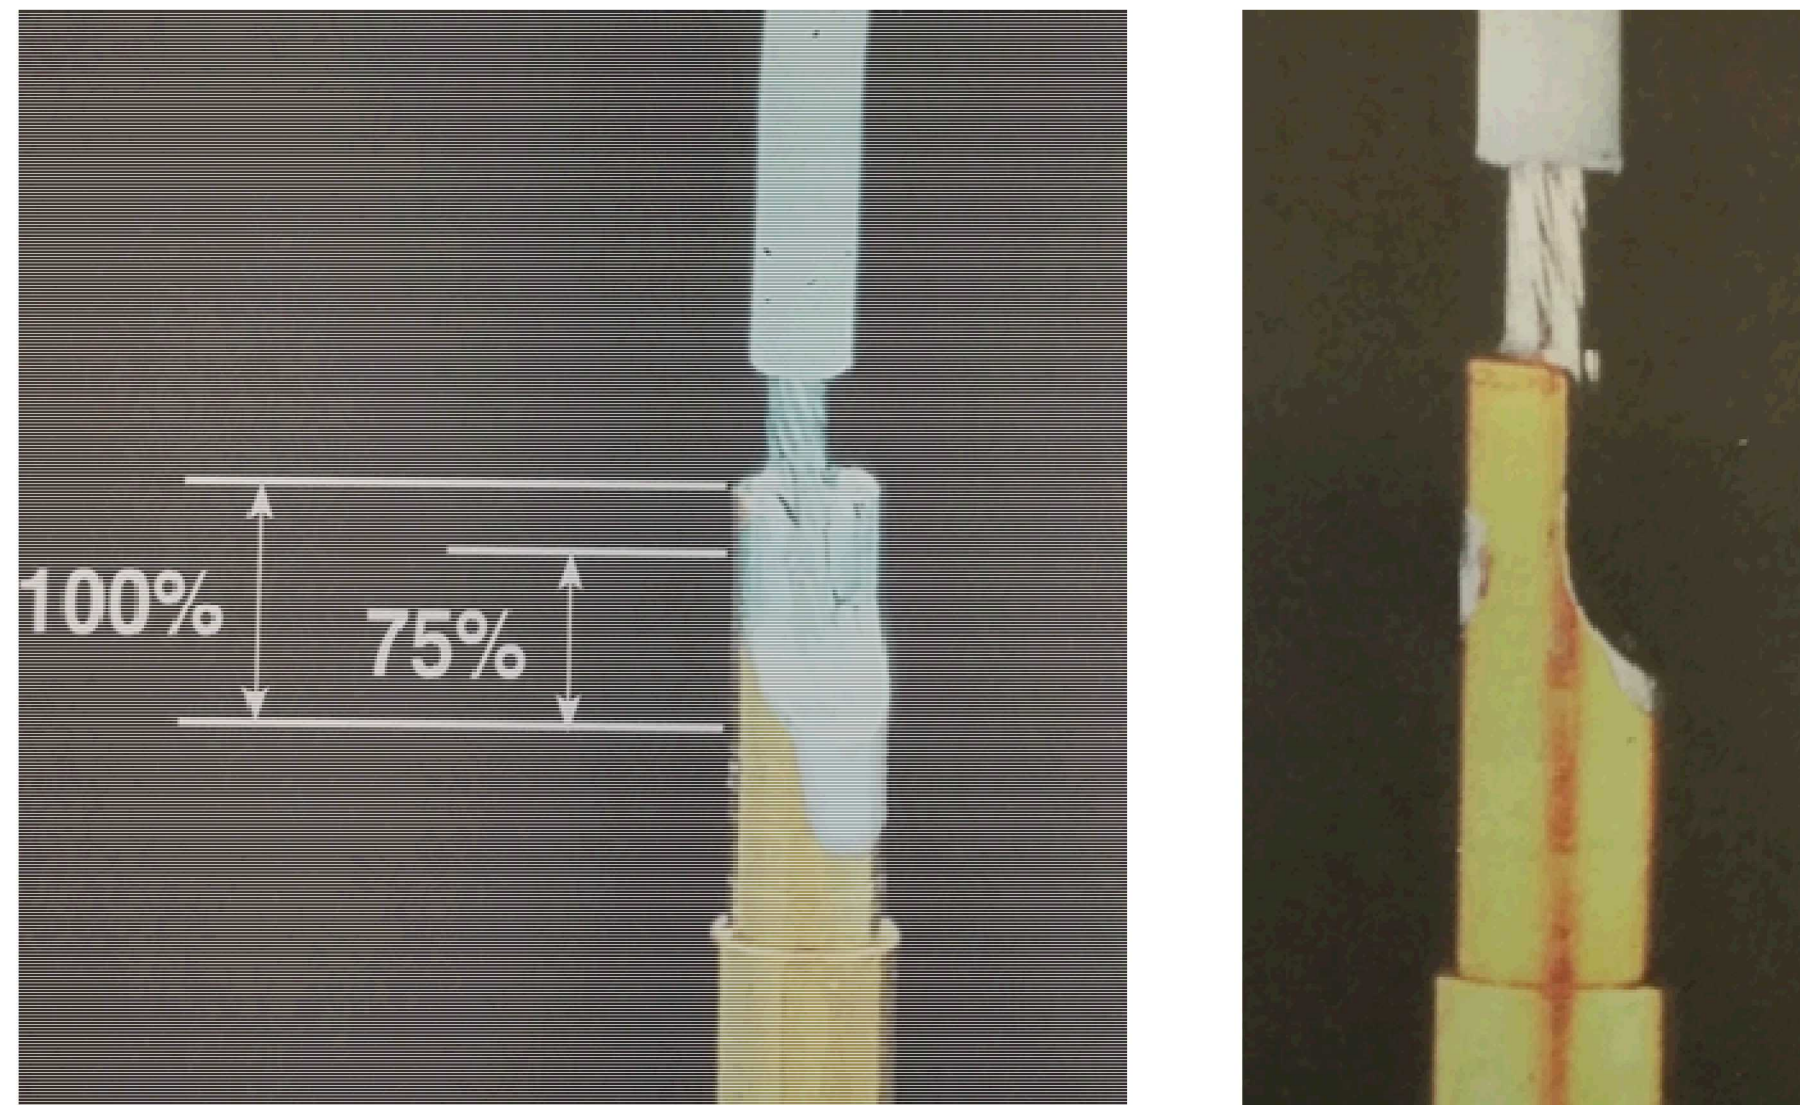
Acceptable solder joint per IPC-A-610 Rev G. The 75% VISIBLE solder fill requirement is highlighted in the left image.
